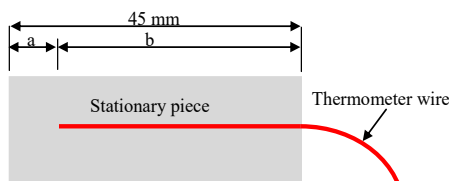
Thermometer by touch, position of the wire into the center of stationary piece, a: axial shortening + 0.5 mm; b: penetration distance of thermometer wire into center of stationary piece
